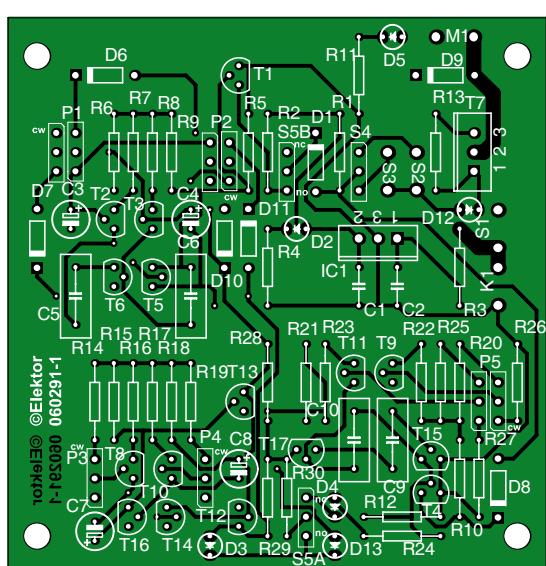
Component arrangement on the printed circuit board designed for the Craft Drill Controller. Copper track layouts available free from our website.
